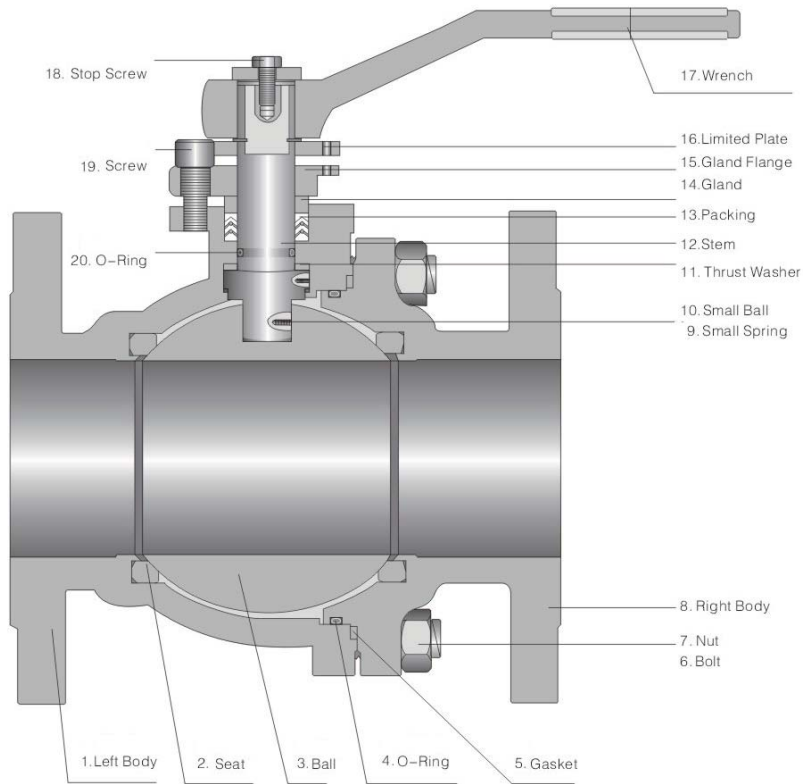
2PC Full Bore Floating Ball Valve Major Features of Type BV2001
